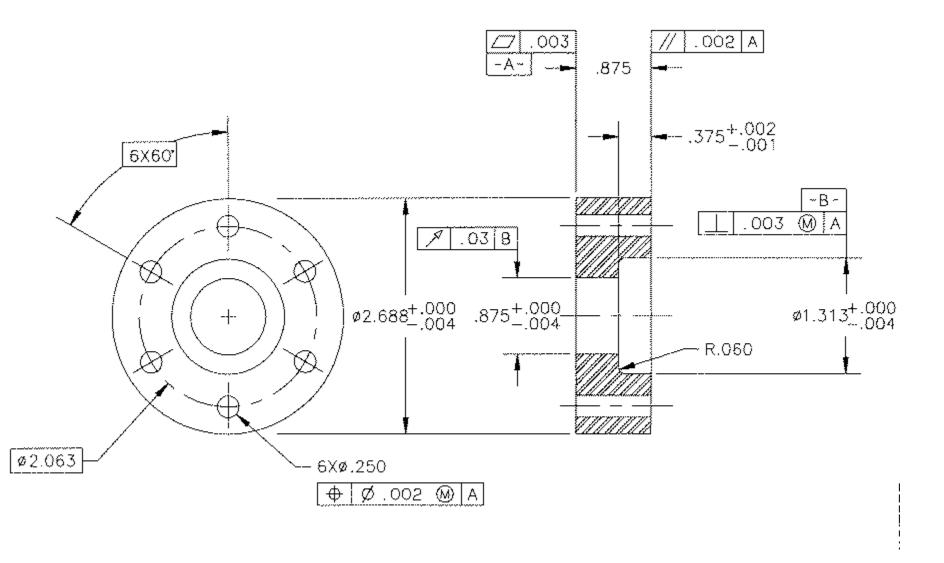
Typical Uses of Geometric Tolerancing
